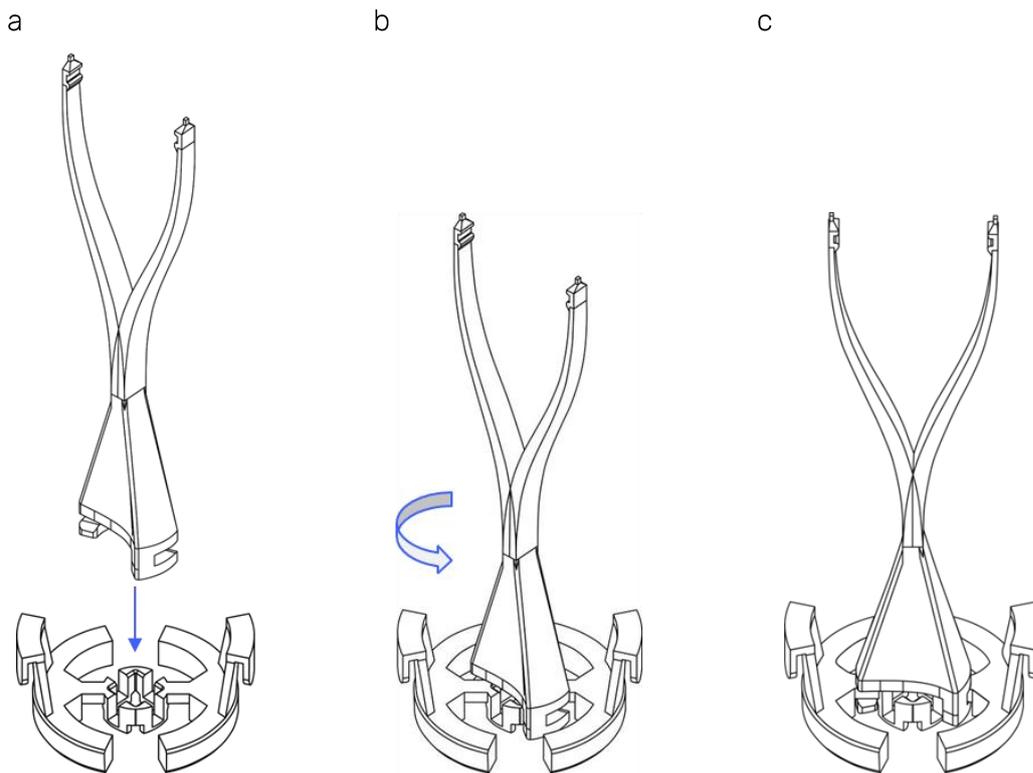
Inserting the handling tool into the frame (a), attaching the handling tool to the frame (b & c).
